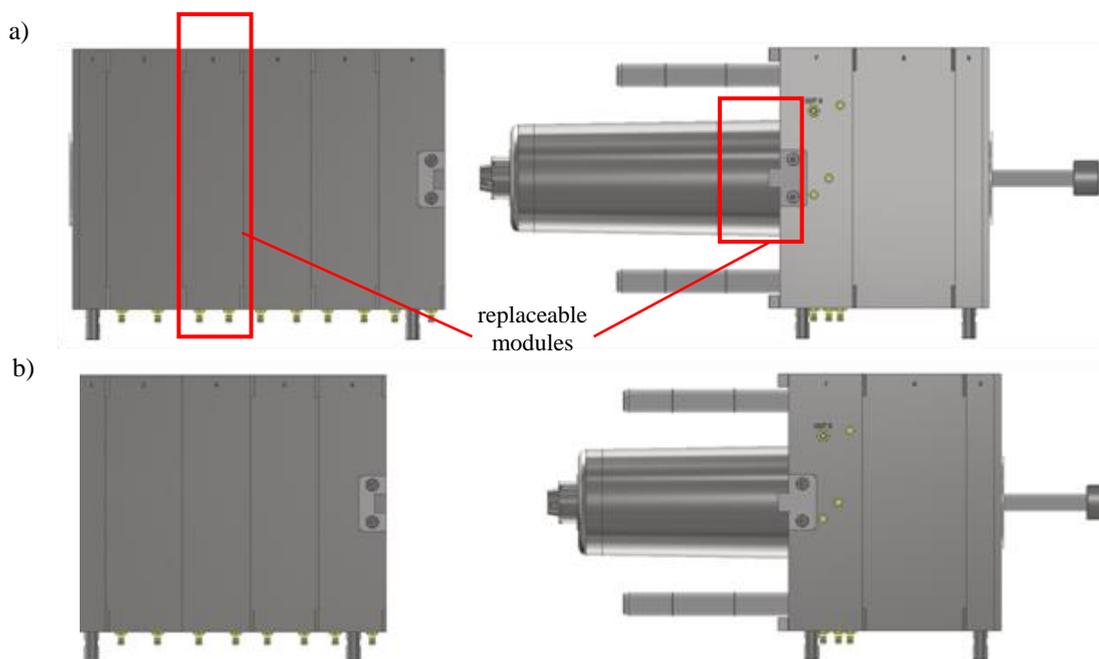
3D model of the modular mould: a) configuration used to make RF150 filter housings; b) configuration used to make RF100 filter housings
